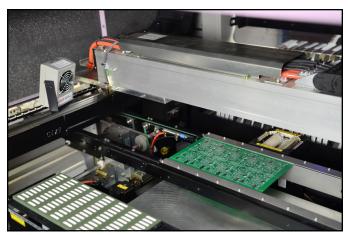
Using the Mini Air Ionizer inside a pick and place machine
